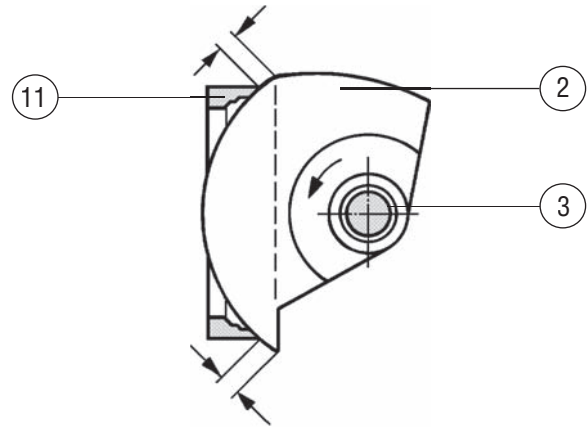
Locating of the ball sector sphere when adjusting the actuator
